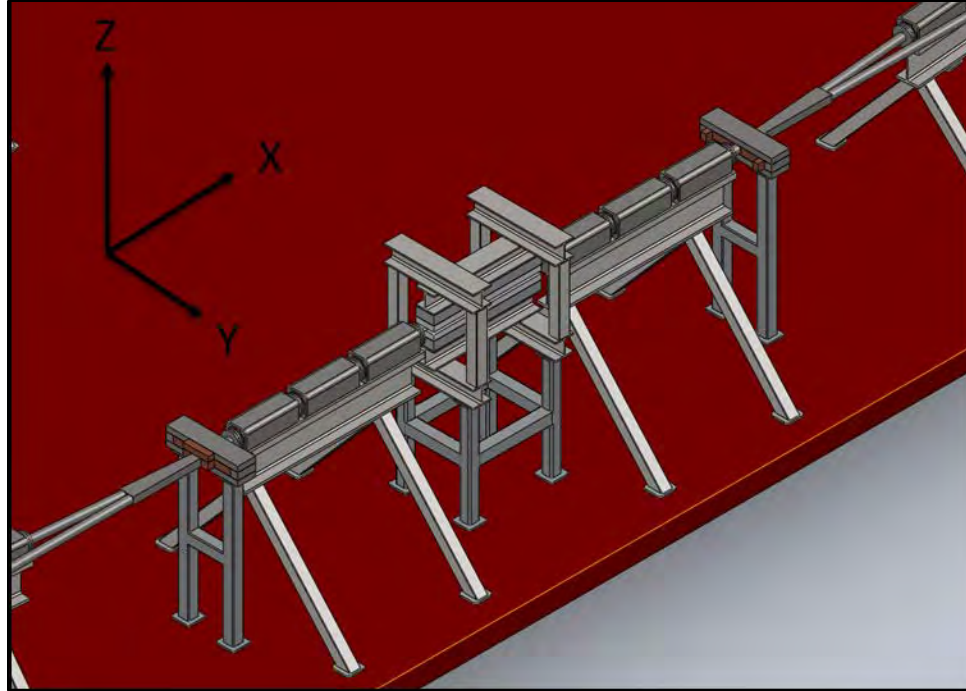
Undulator Assembly with Inlet and Outlet Alignment Quadrupole Magnets
